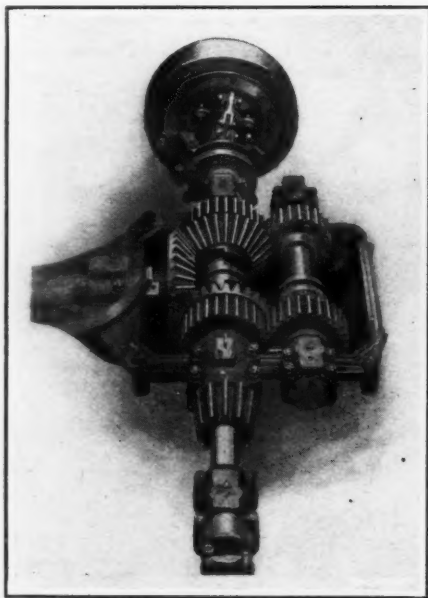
Master Clutch and Transmission Assembly of 75-horsepower Tractor
